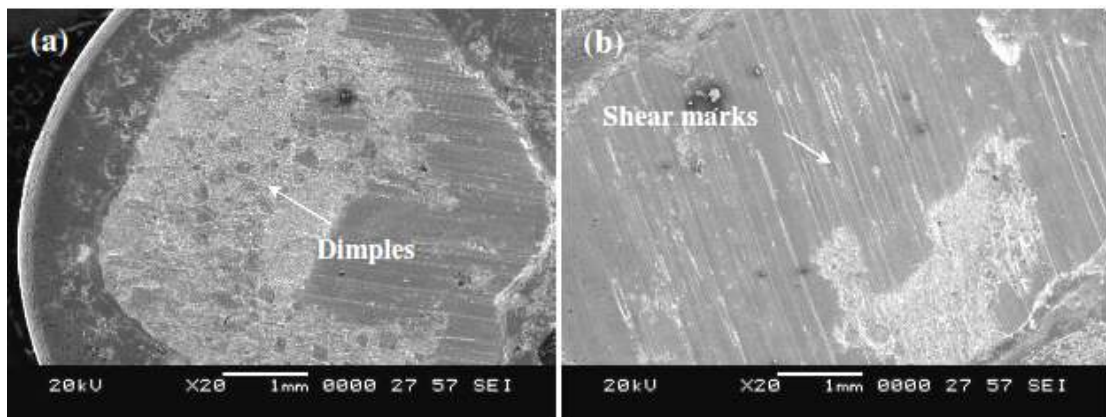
SEM micrographs of the fractured surfaces of Sn-3Ag-0.5Cu solder (a) smooth Fe-Ni (b) rough Fe-Ni substrate surfaces
